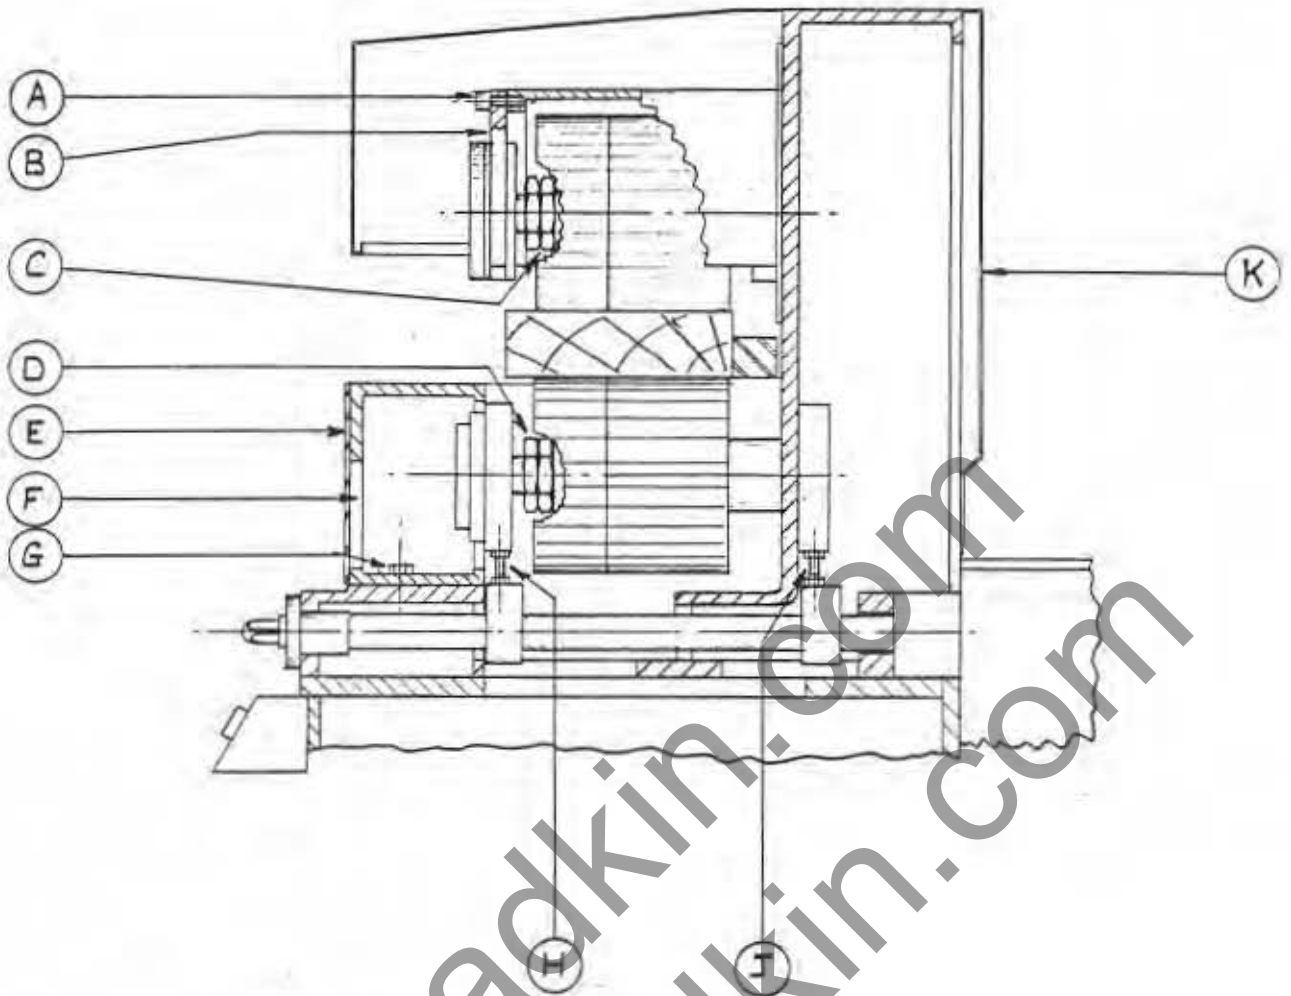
SECTIONAL VIEW OF FEEDWORKS
